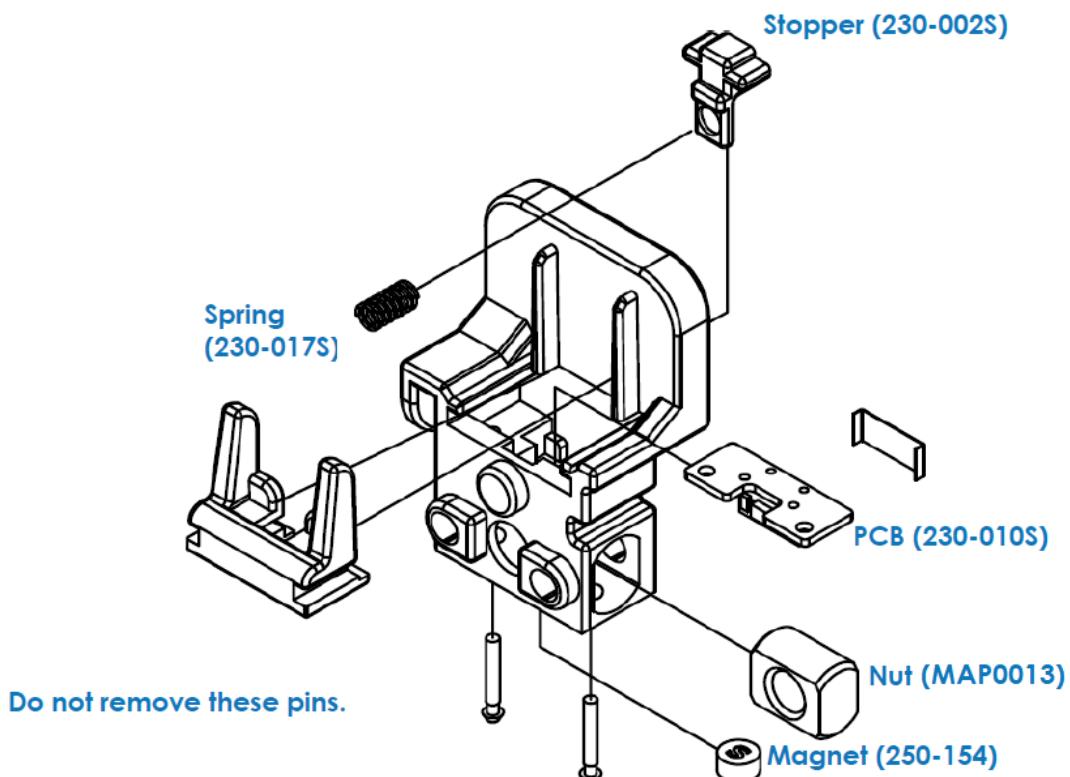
Actuator Assembly (ASSY000045 - You can order 230-018PS, which includes the cover)
